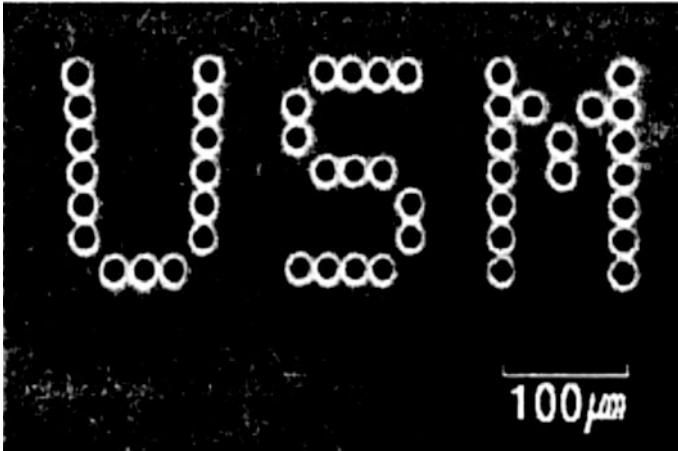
Machining of 48 holes with a single SD tool [4]
